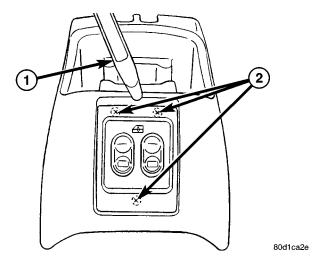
WINDOW SWITCH REMOVAL (REAR SHOWN - FRONT SIMILAR)
